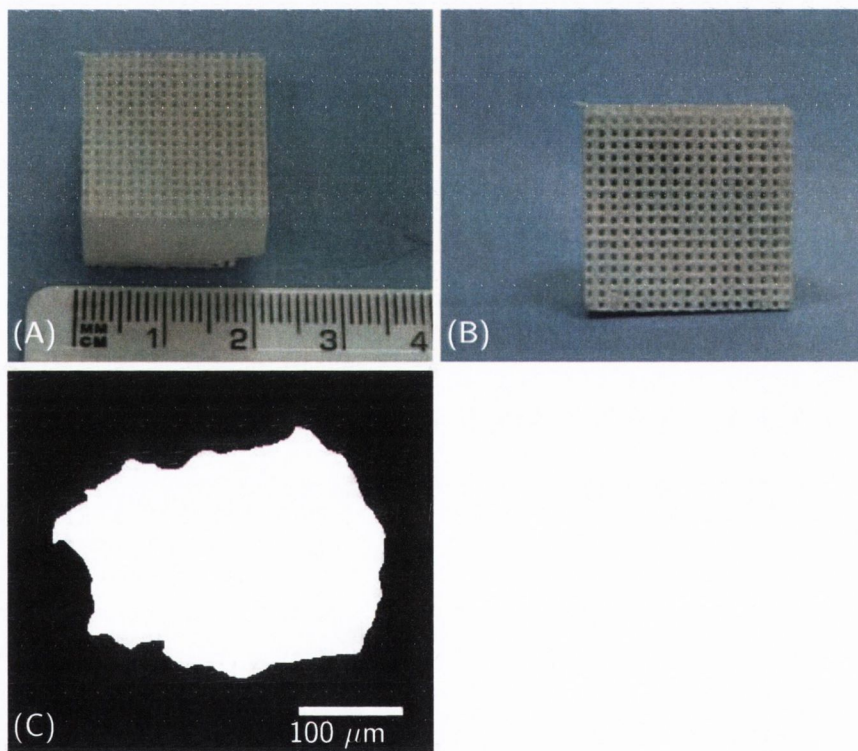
(A) and (B) Solid free form (SFF) fabricated scaffold produced using selective laser sintering (SLS) technique. Material is Duraform polyamide. (C) Threshold image of a single pore showing poor symmetry formed through selective laser sintering.
